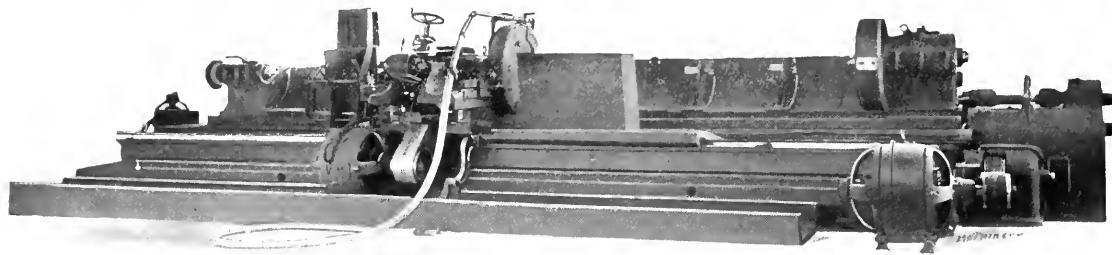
Rear View of Landis Grinding Machine shown in Fig. 1
